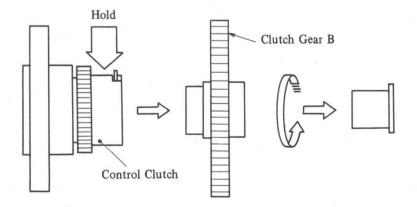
Paper Feed Cam Drive Disassembly (B)
